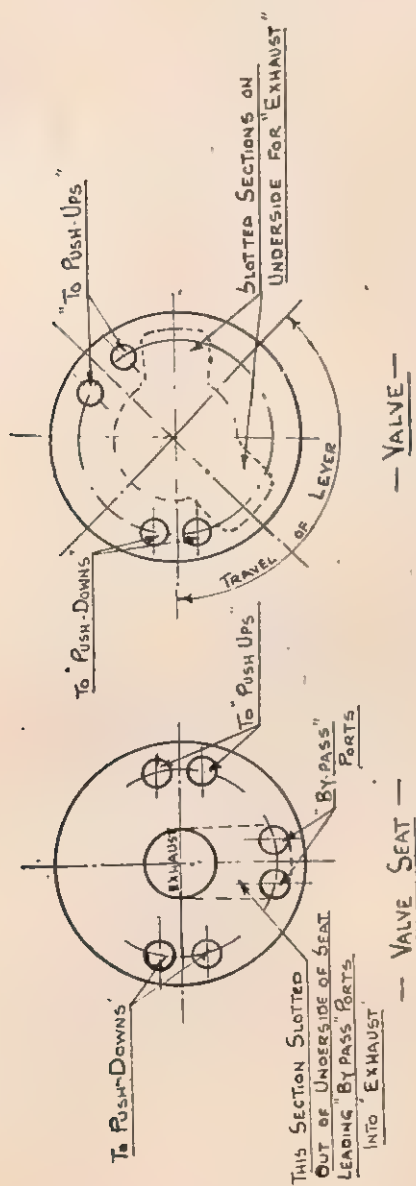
Valve and Seat for Double-Acting Rotary Face Valve with By-Pass.
